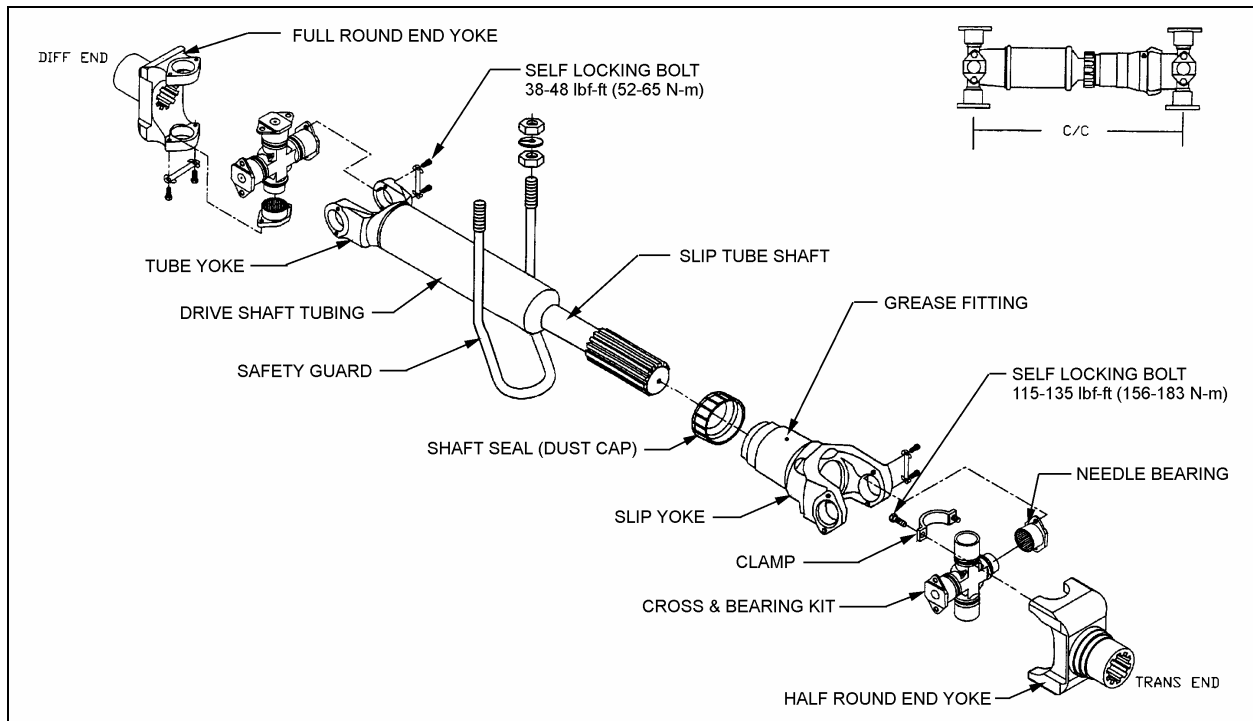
PROPELLER SHAFT ASSEMBLY
